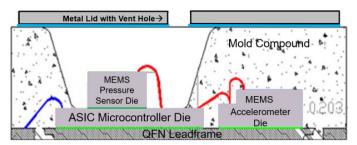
Side by side and stacked layout of the three die in existing HVM 7x7 mm QFN.
